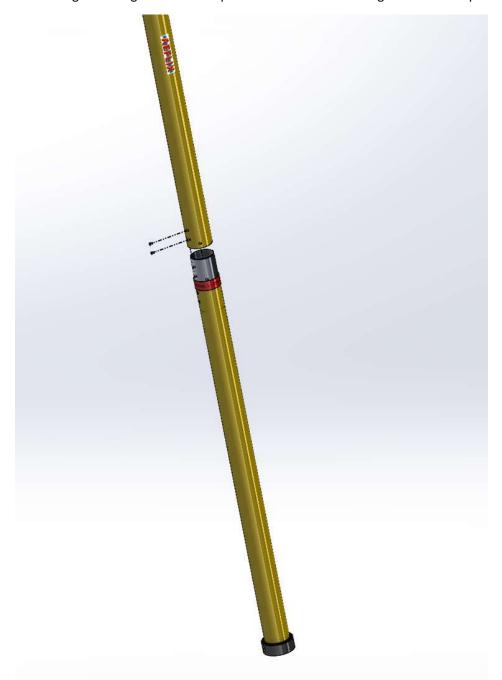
Beam assembly – 2 (reflector assembly side cut – see previous page)
